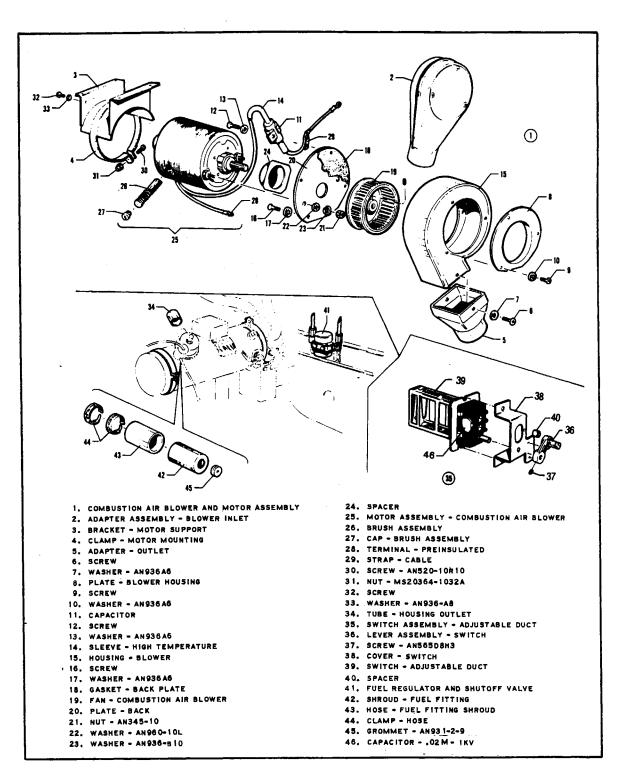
Exploded View - Combustion Air Blower and Motor Assembly No. 753 443 (14-volt), 758 120 (28-volt)
